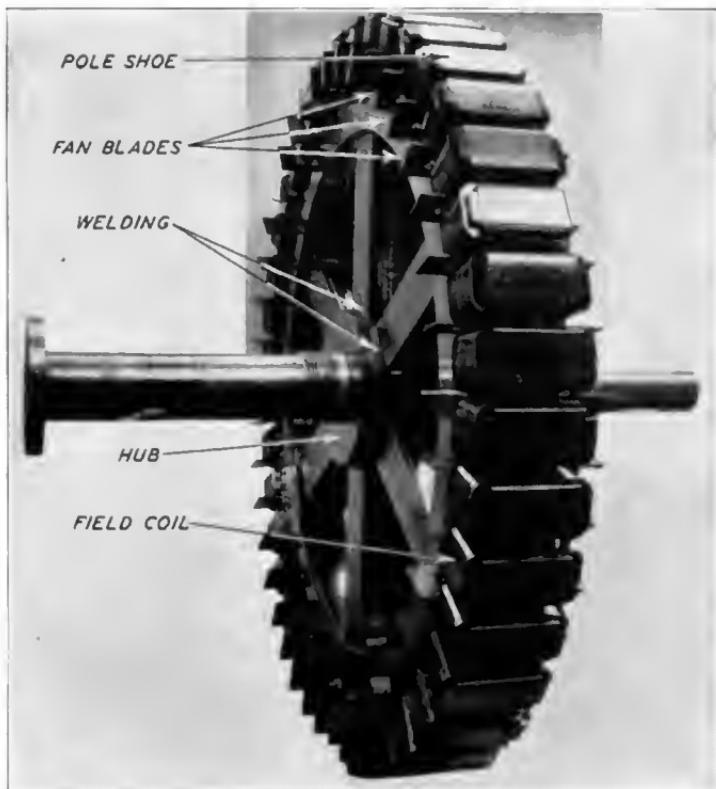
A Rotor Built up by Welding Steel Plates and Angles. The Poles are Fastened to the Rotor by use of Dovetail Slots
